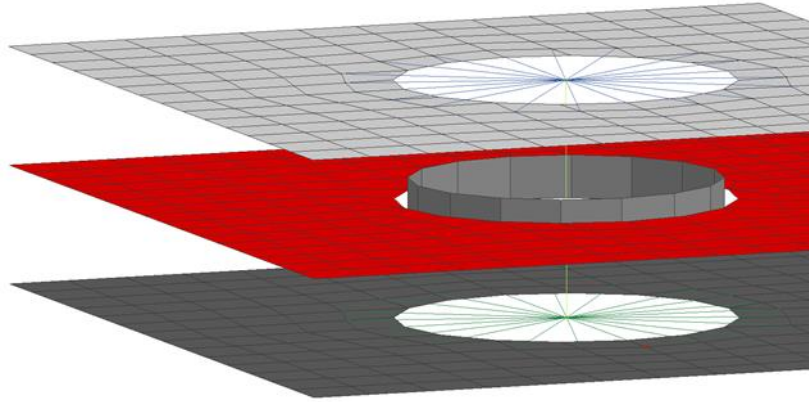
Close up view of the cross tension mesh showing the clamping fixture components and bolt ring.
